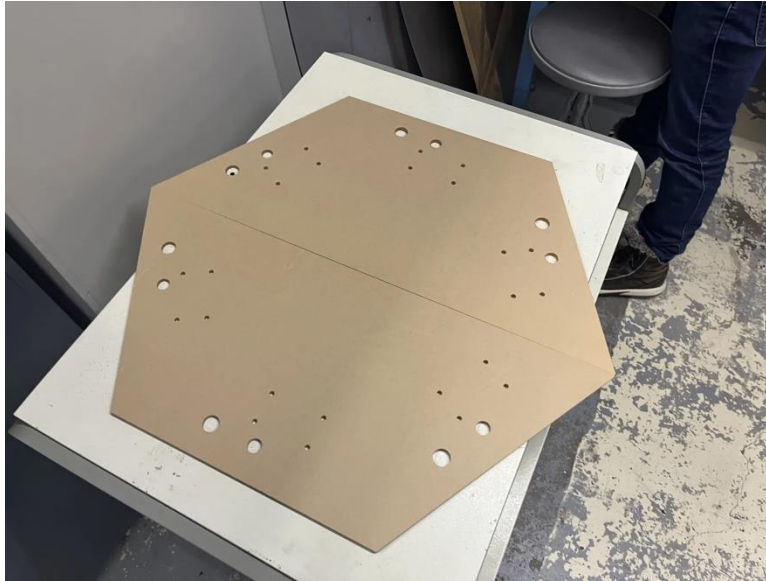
The acrylic shelf being fabricated in a laser cutter with the protection still attached
